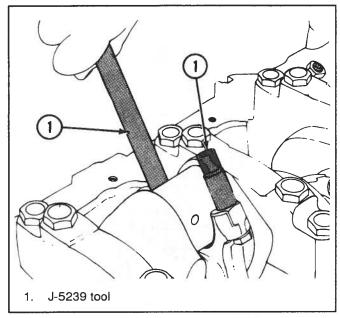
Pulling Assembled Piston And Connecting Rod Into Place
